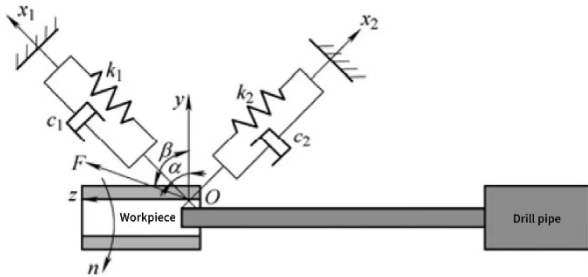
Ultrasonic Vibration Mechanism for Deep-Hole Drilling
